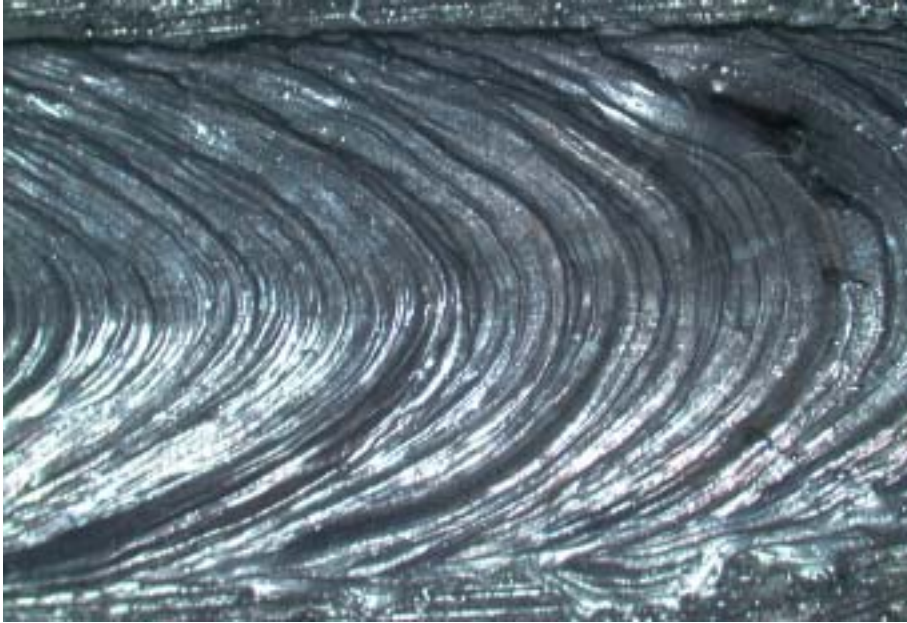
Surface appearance of Cromanite welded in an Ar-24,5%N₂ shielding gas atmosphere.
